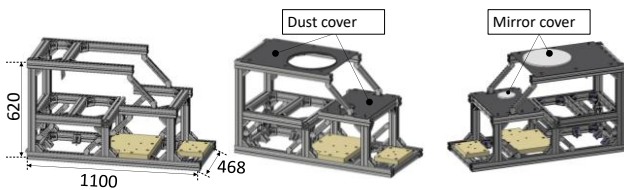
External frame of WAV-M1&M3 Optical Cage showing dust and mirror covers as well as key dimensions in millimetres.
